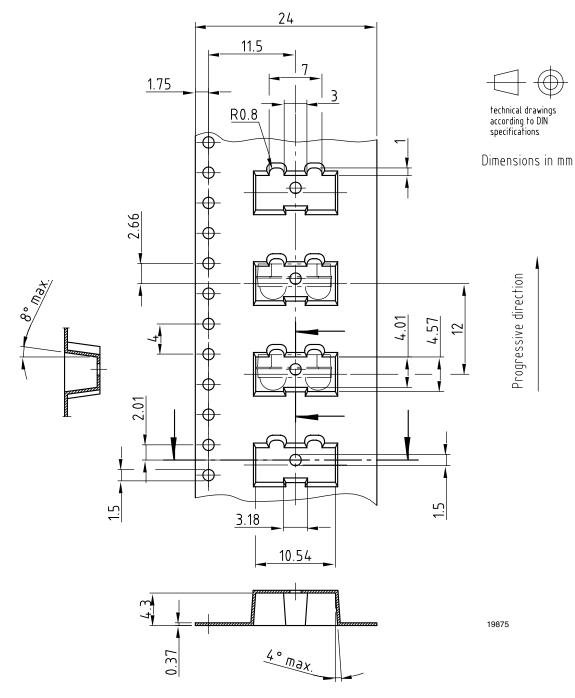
Issue: 3; 02.09.05
